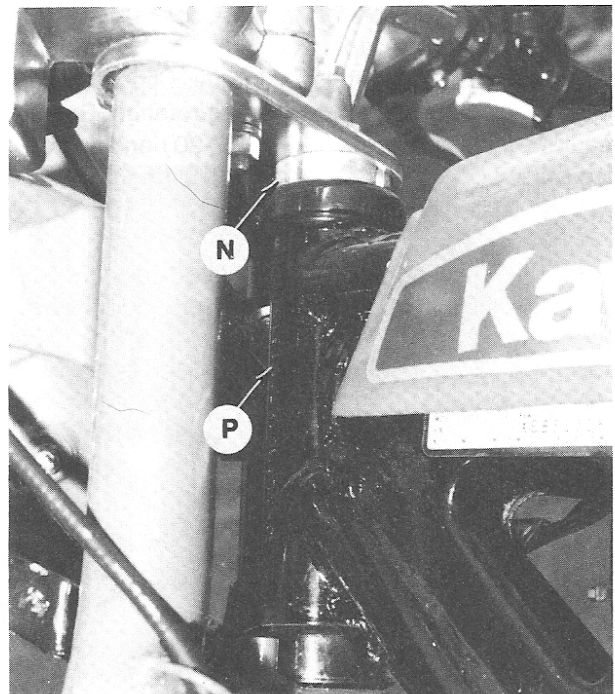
Stem nut (N) controls steering bearing preload. Inner-bearing races seat in head pipe (P).
